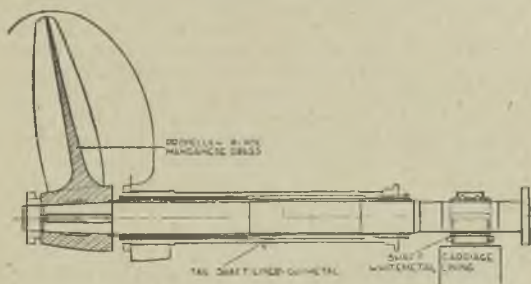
ARRANGEMENT OF PROPELLER AND STERN-TUBE.
